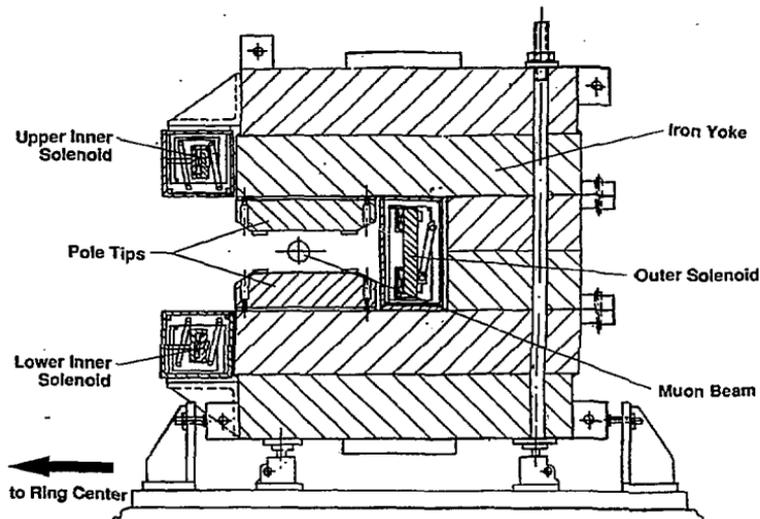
A Cross-section view of the g-2 storage ring showing the three large solenoids
